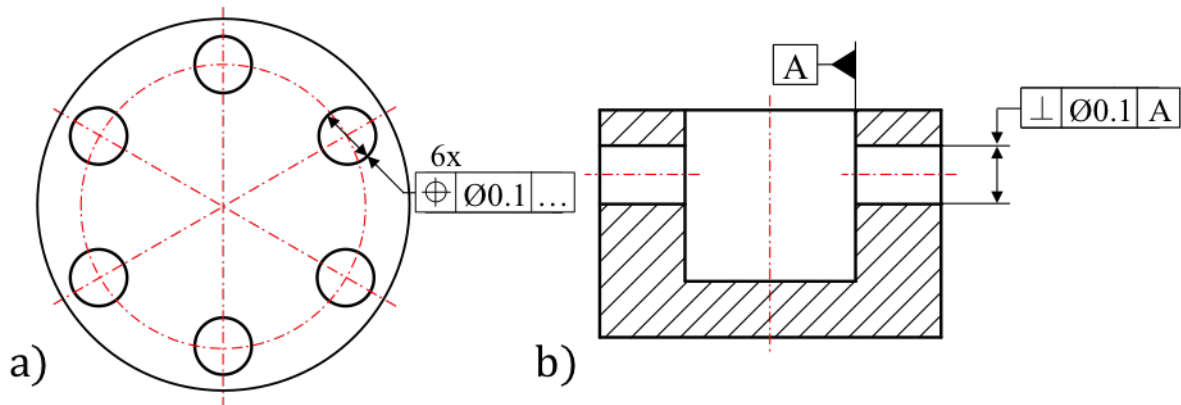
Examples for feature groups with one tolerance: a) position tolerance of a hole pattern and b) perpendicularity of two hole axes in a symmetric part
